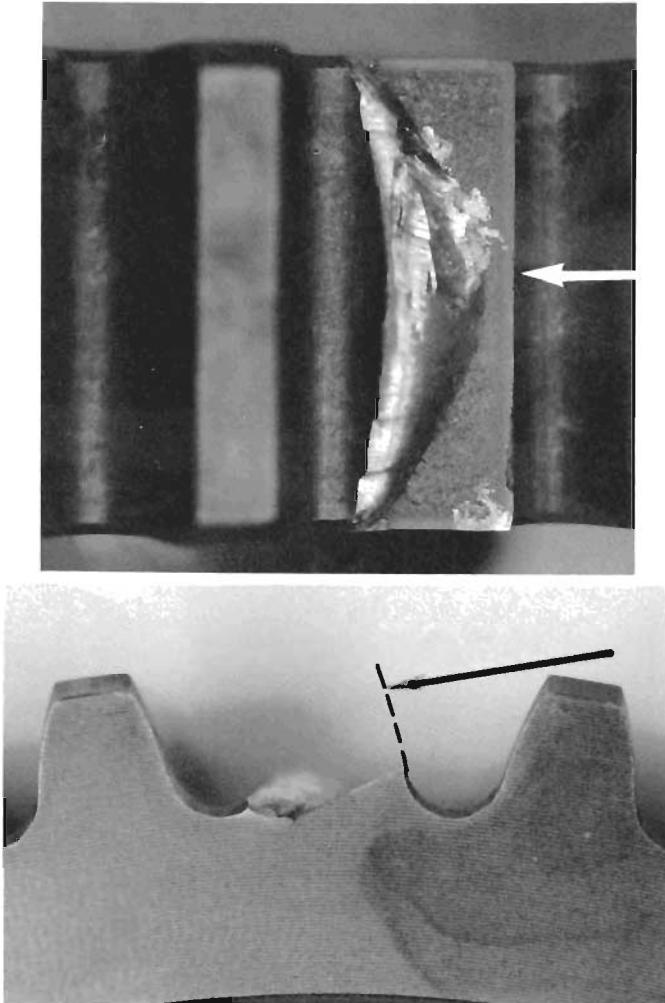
Spur gear tooth. Combination modes: Tooth bending impact (top); tooth shear (bottom). Arrows indicate direction of applied force.
